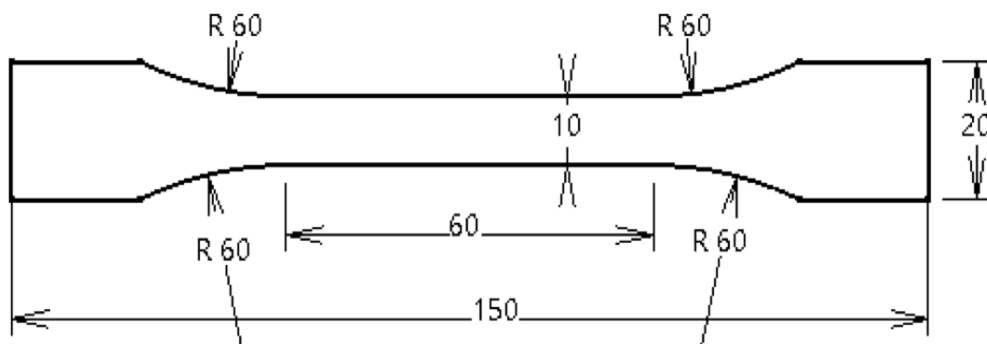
Dimensions of the tensile test specimen. The units are in mm
